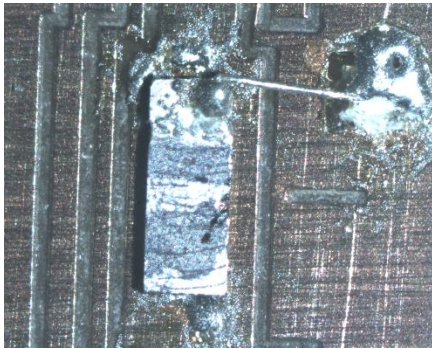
Test 1: Transducer soldered using the standard method. It appears as if the solder paste has problems with wetting the surface properly and that it balls together.
